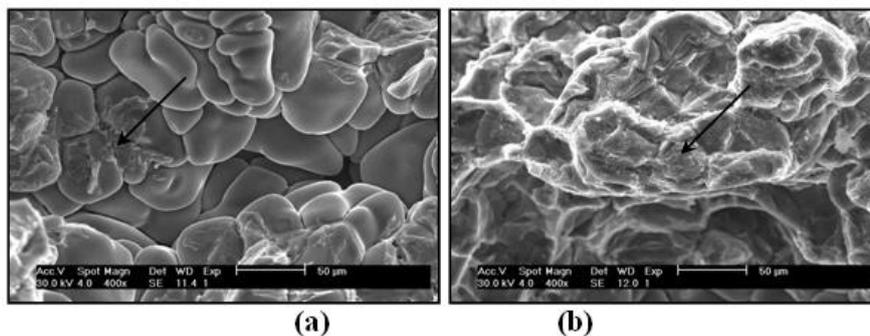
SEM fracture surface photographs of Al-20%MgO MMC at 400X. (a) Tensile. (b) Impact.
